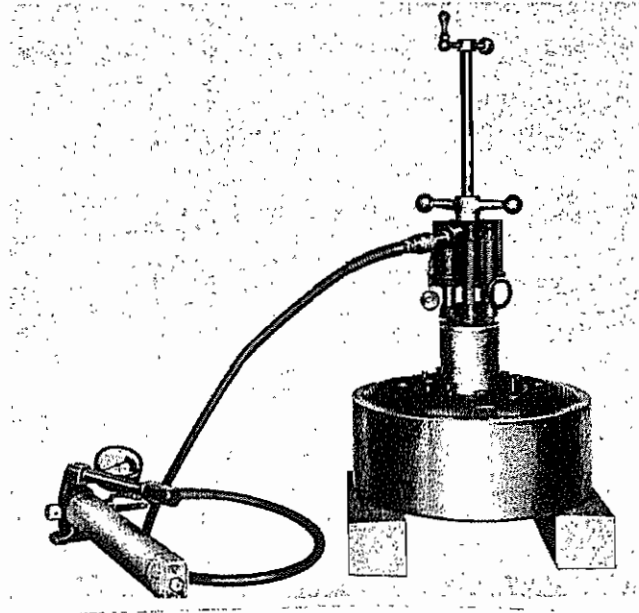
Compressing Pressure Springs To Install Throwout Plate Capscrews (T-22039)
